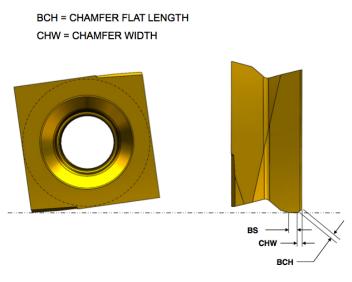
Cutting Tool Measurement Diagram 6 (Cutting Item – ISO 13399)
